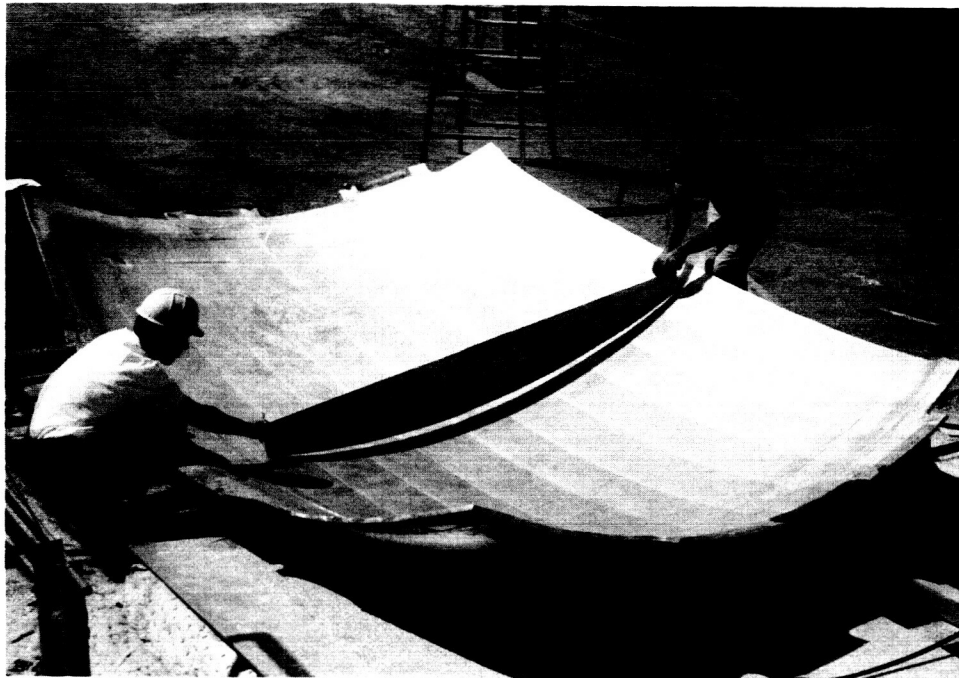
Test No. 7 Base Blank No. 3 Untrimmed
